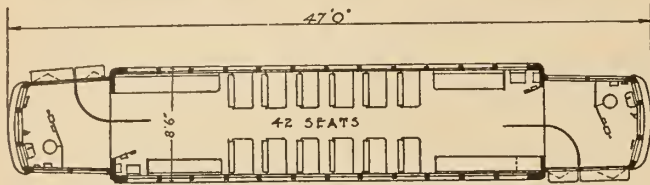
, — Elevation and Floor Plan of Pay-as-you-enter Car converted to Front Entrance for "One Man" or "Two Man" operation, Toronto.
